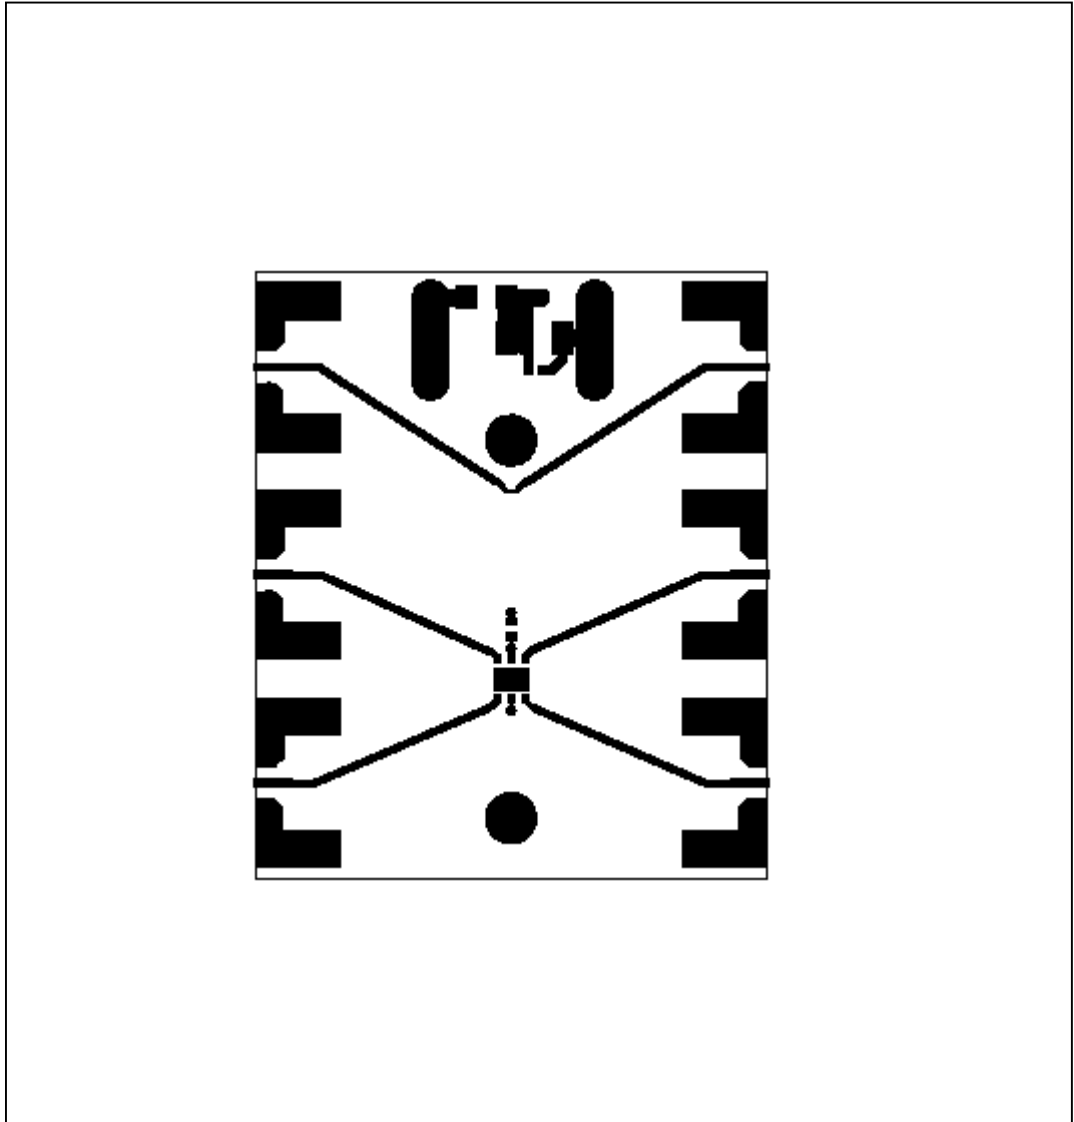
MAX3785UTTA EV Kit PC Board Layout – Component Side (2X), layer 1.
